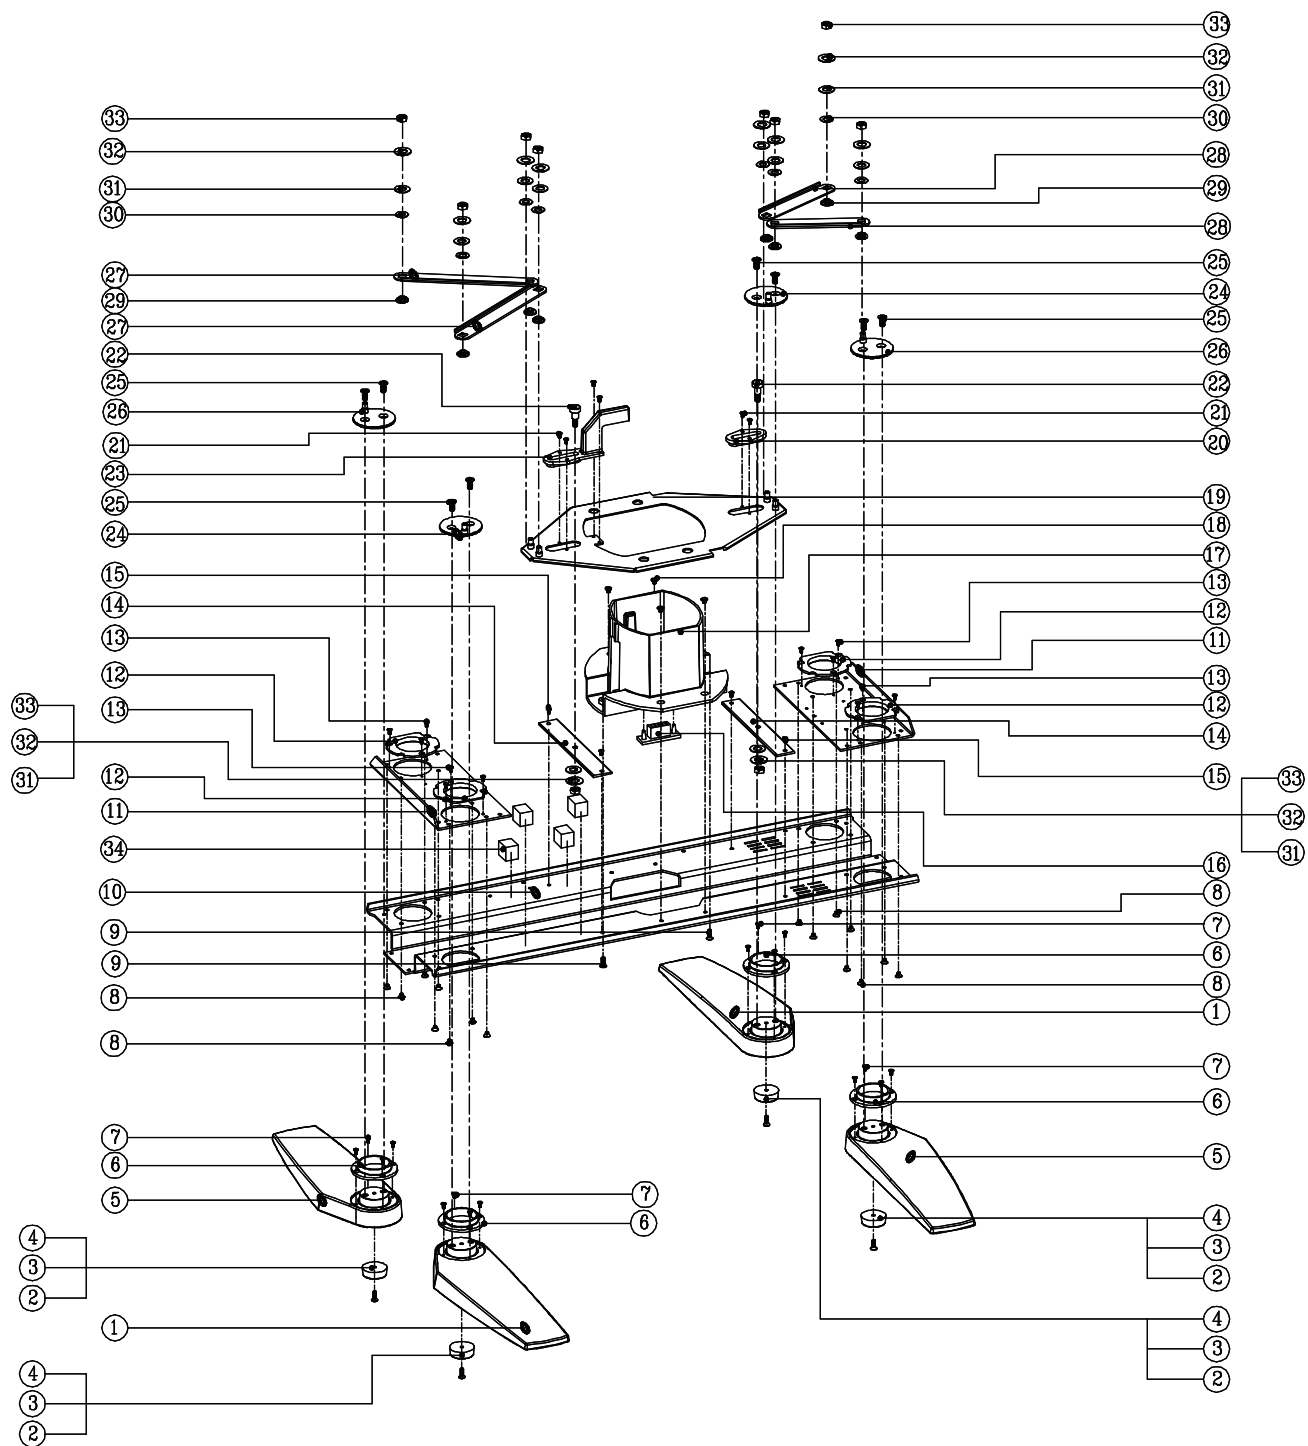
Power Stand Cavity and Leg Assembly Exploded View
